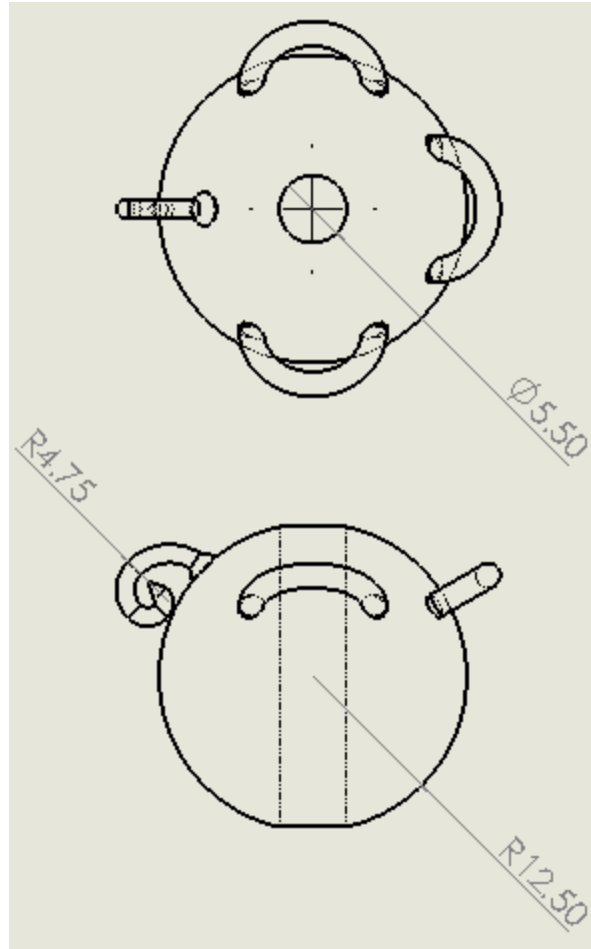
Dimensioned drawing of the skull side of the skin mold.
